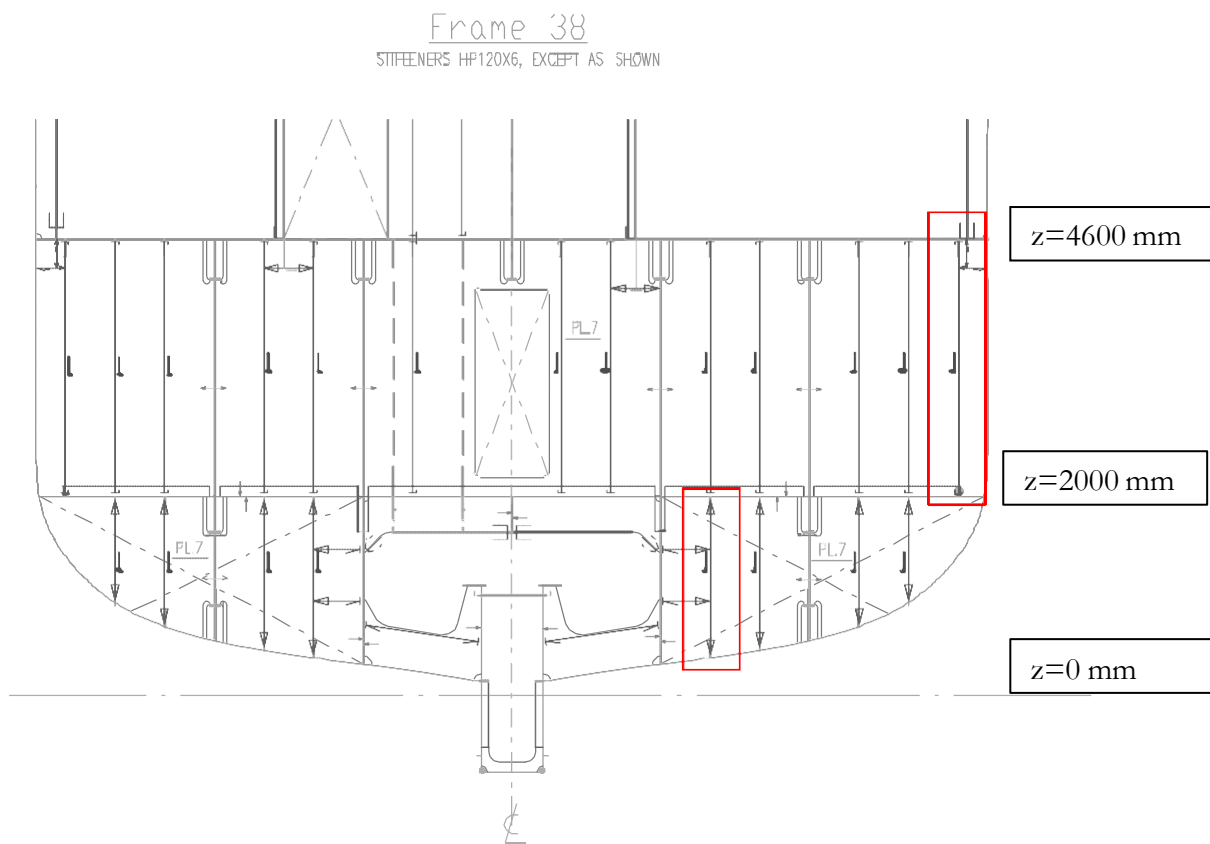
Frame #38 Bulkhead plate thickness and stiffeners size.
